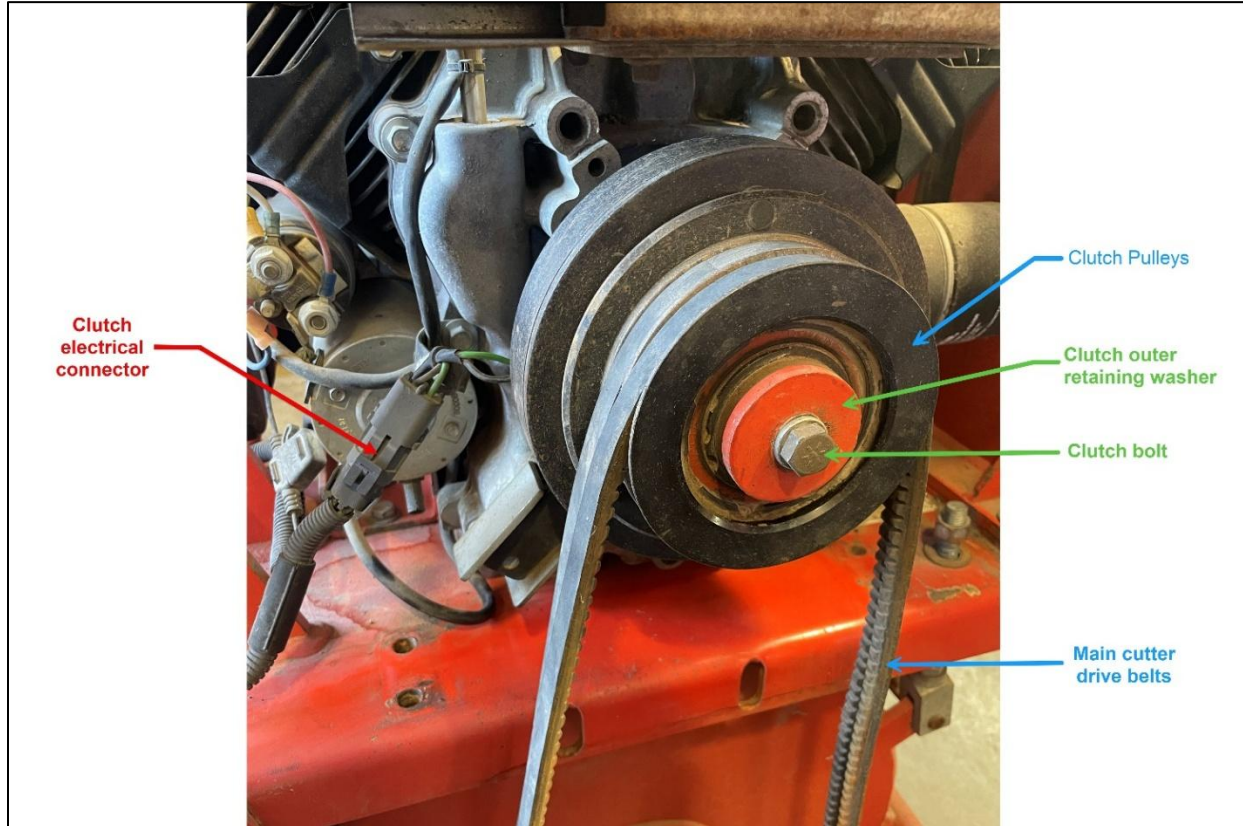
Model 30 Router Clutch and Drive Belt Assembly
